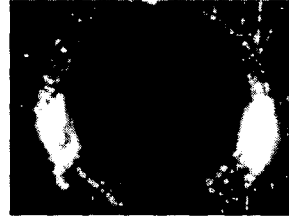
Micro drilled hole(feed 60, step20, rpm 30000)
